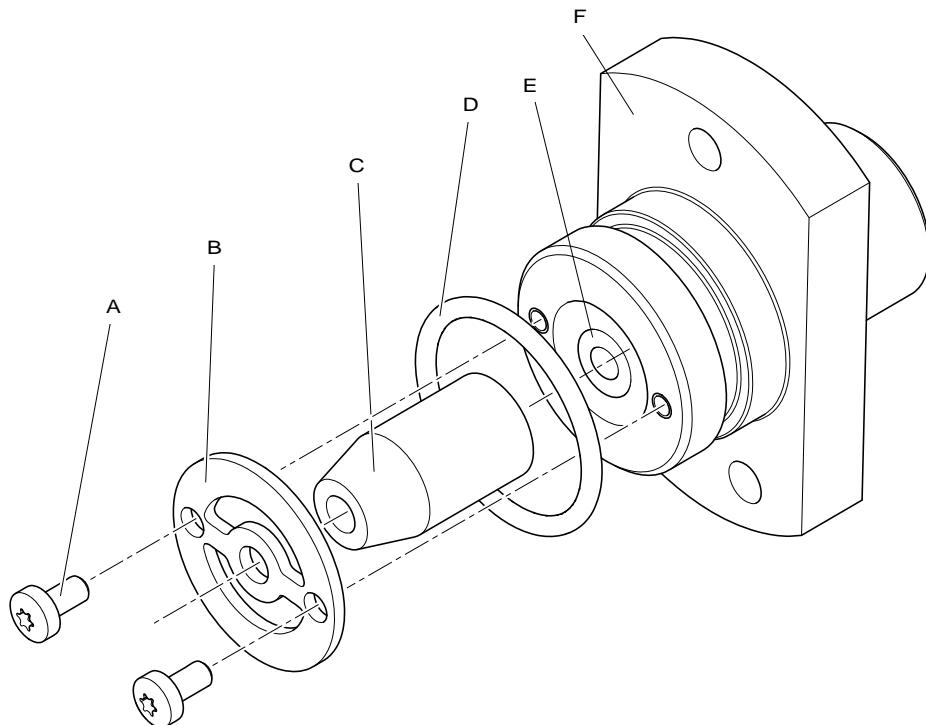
HPO Inlet Filter Removal/Assembly (PN160497 Service Kit)
